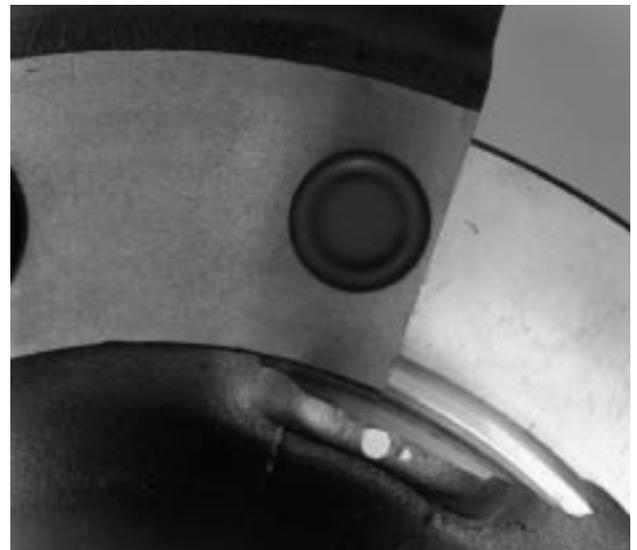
Gunitite-Lite drum with .91" mounting hole for use with aluminum hub.
